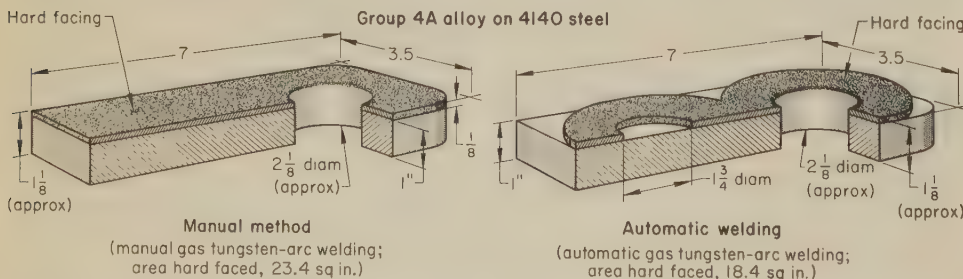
Sectional views of valve gates hard faced by manual and automatic gas tungsten-arc welding. Because of selective deposition when using the automatic method, a smaller quantity of hard facing alloy was consumed. (Example 157)
